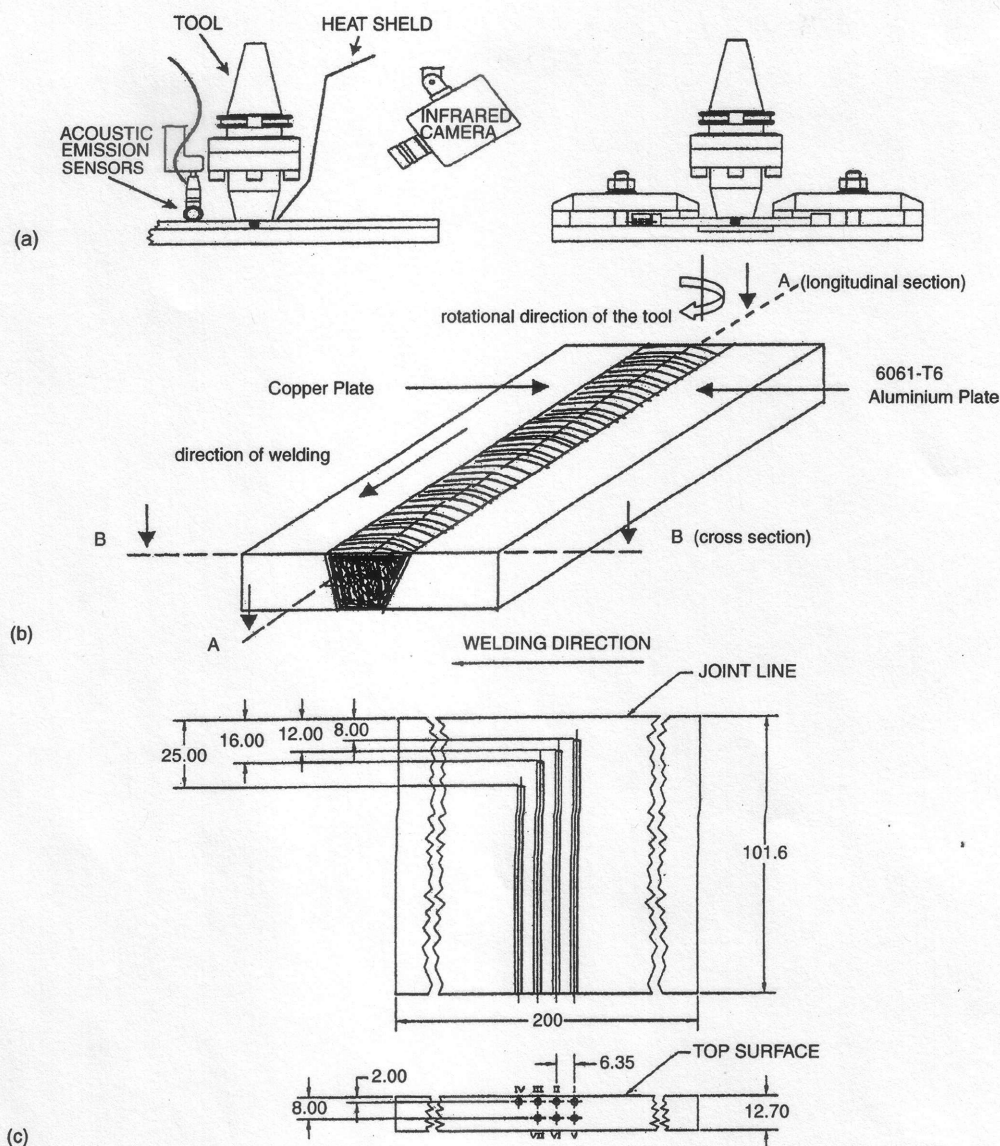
Experimental set-up and weld configuration: (a) experimental set-up; (b) schematic diagram showing the positions of the samples taken from different sections of the welds; (c) schematic diagram showing the positions of thermocouples imbedded into the 6061 aluminum alloy plate.
